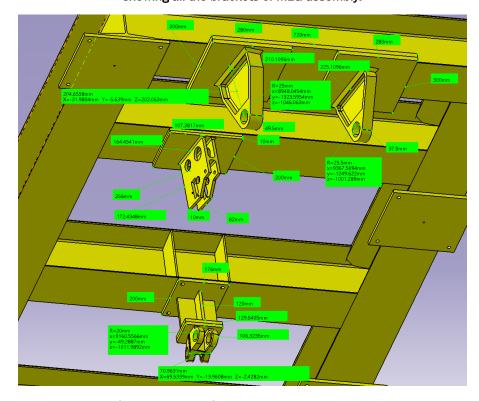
C: Major dimensions of the existing MLG mounting brackets (LH shown, RH symmetrically opp)
